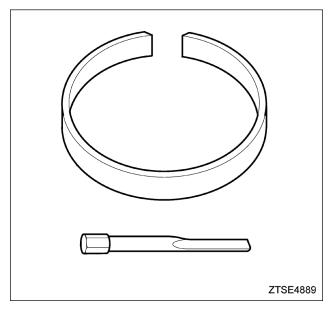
ZTSE4889 Rear Wear Sleeve Remover
